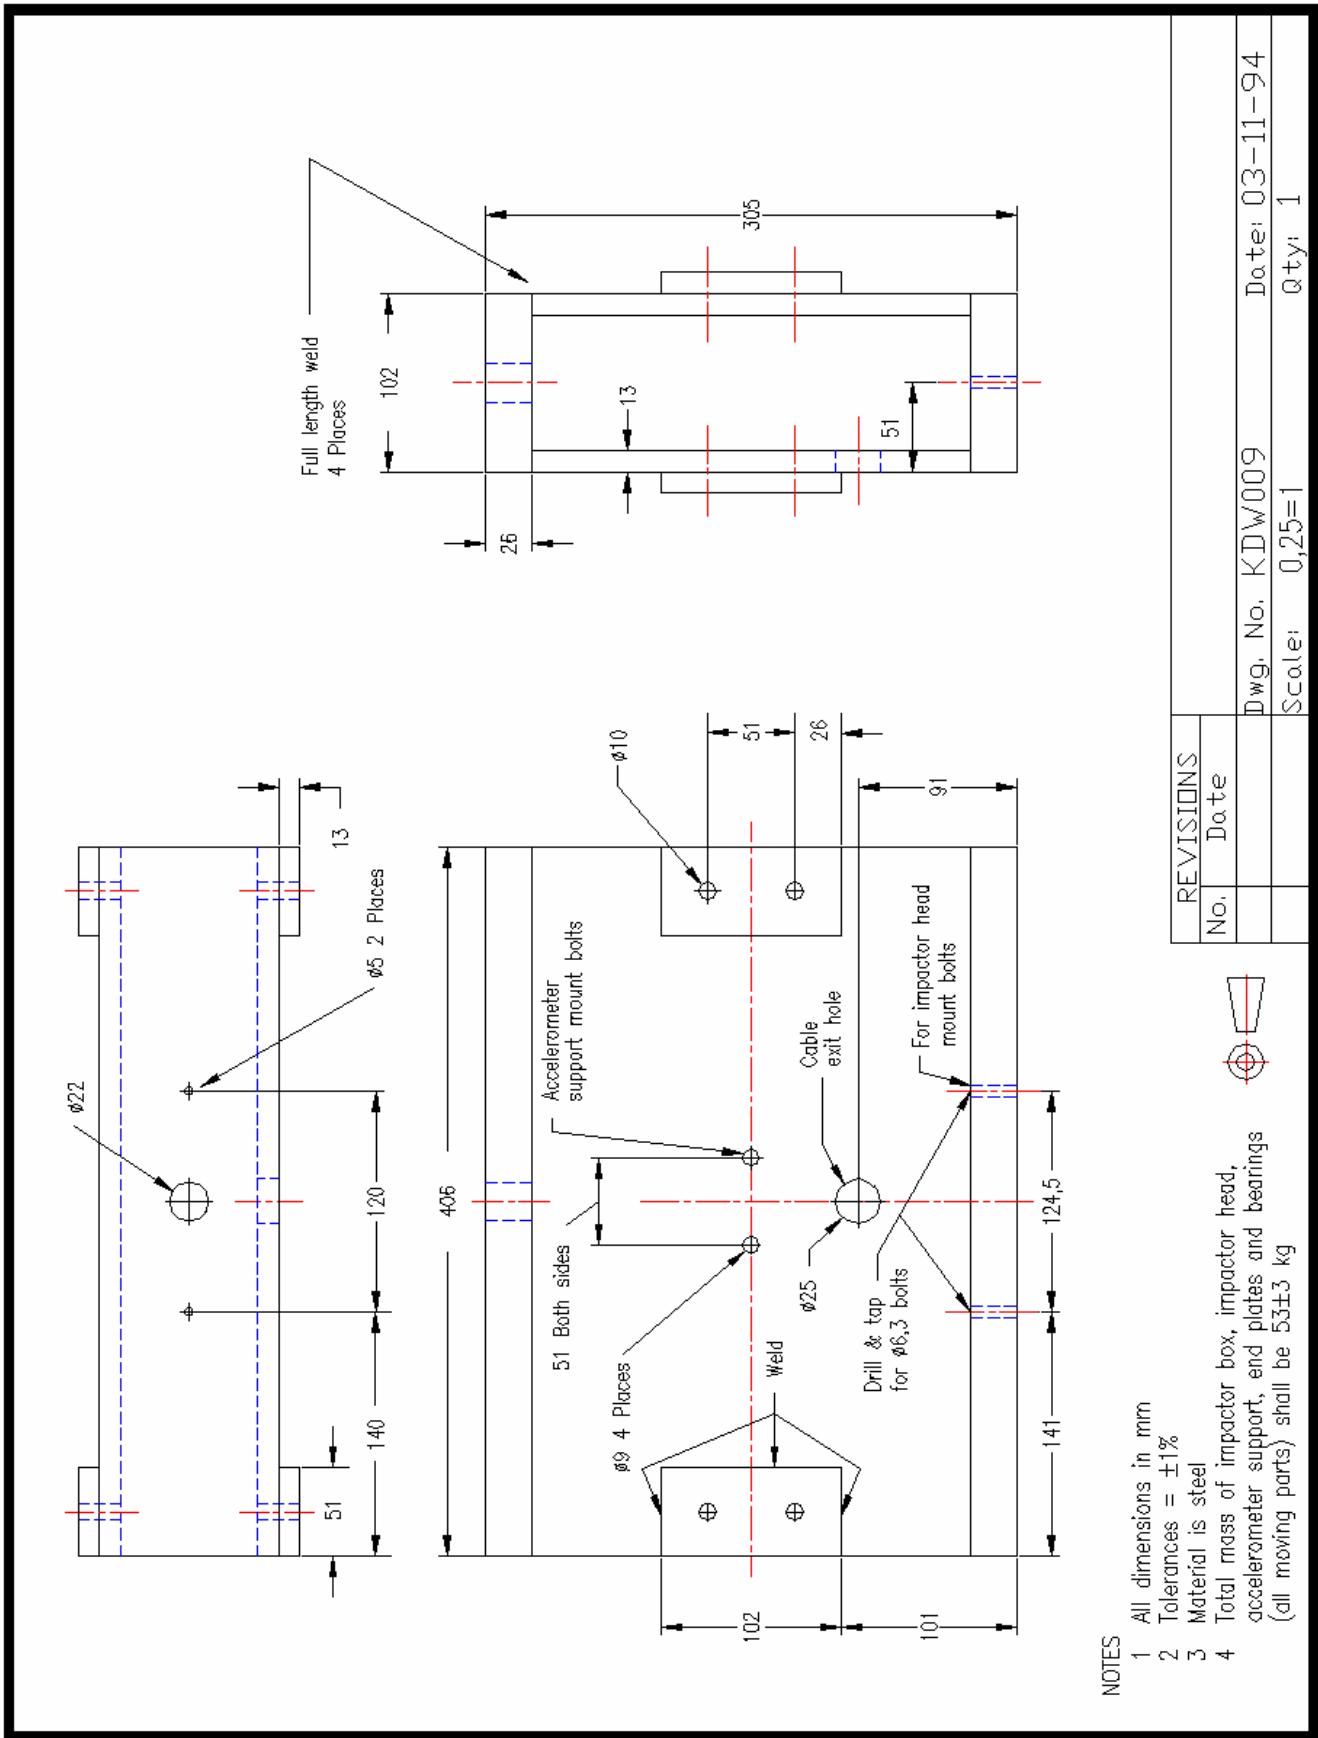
Impactor box for the bone dynamic bending fracture test
